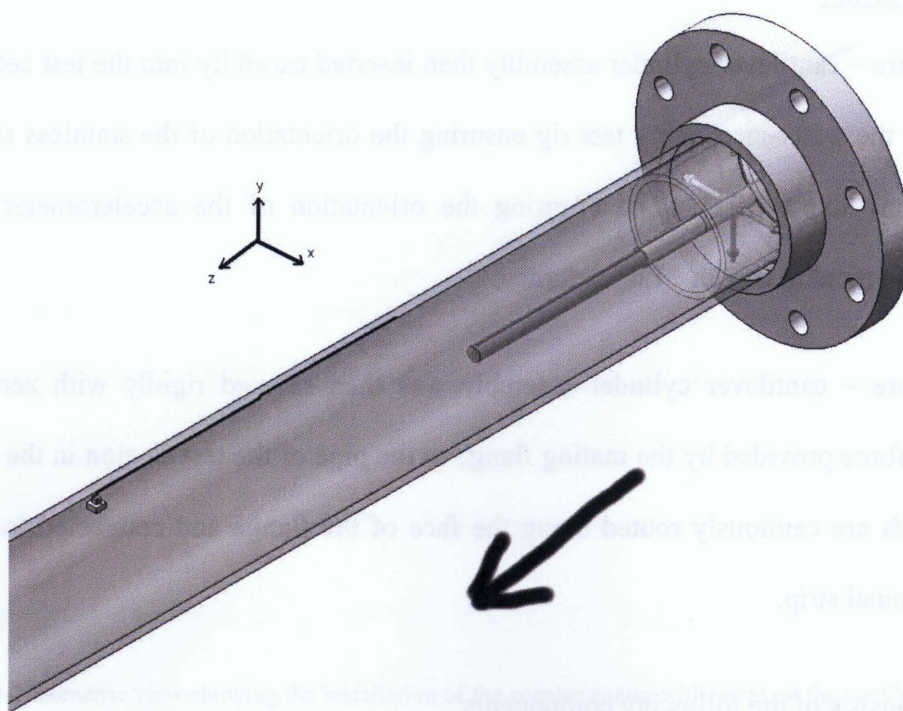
The test section with the fixture-cantilever cylinder assembly
